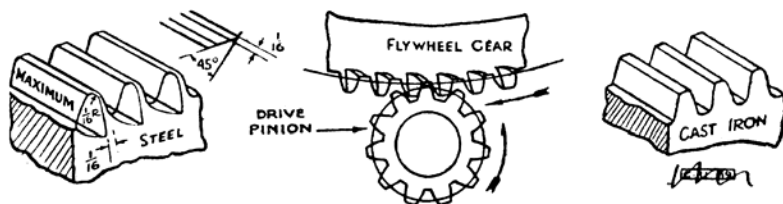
Flywheel Construction and Teeth Chamfering.
